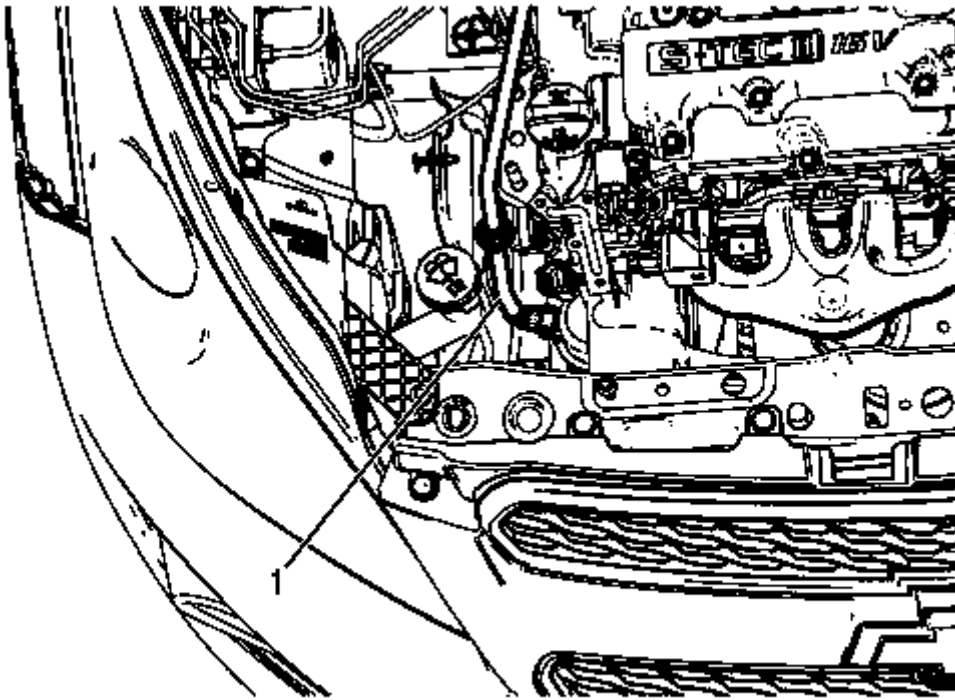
Power Brake Booster Vacuum Hose Quick Connector
